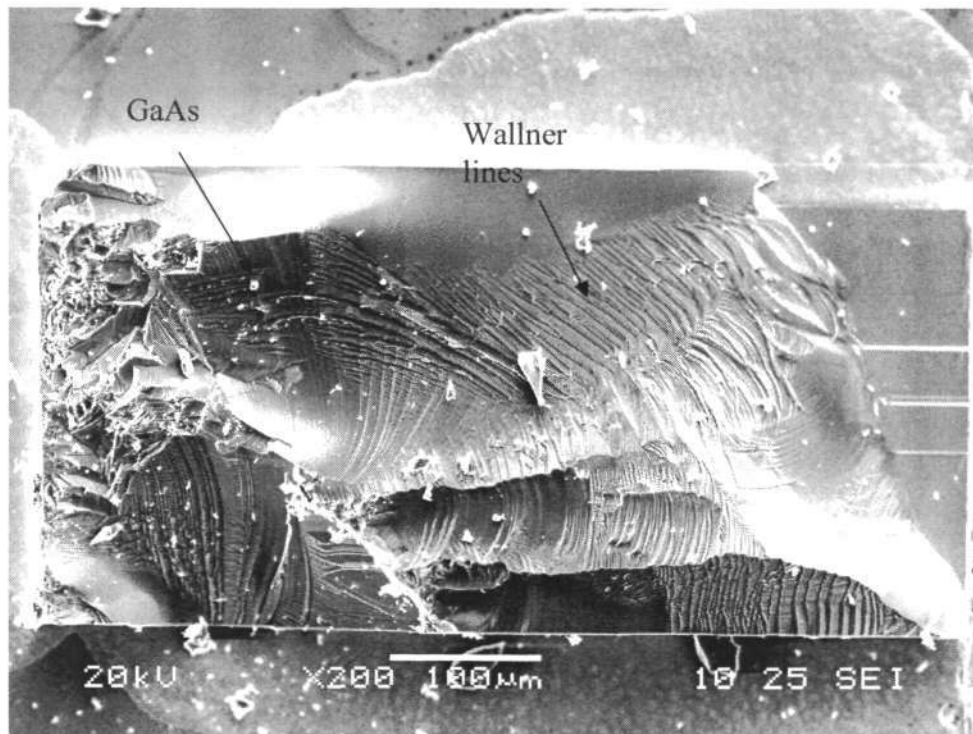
Fracture analysis of well-bonded LDs after shear test. LD residues was found on the fracture surface after shear test.
